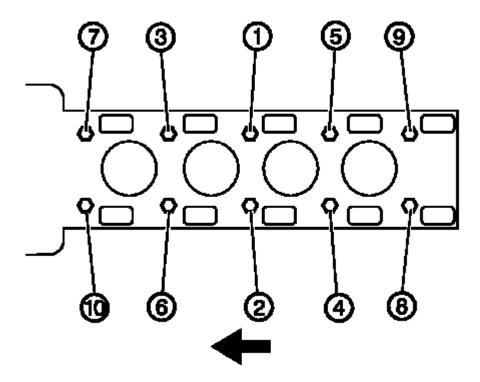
Cylinder Head Bolt Tightening Sequence Courtesy of GENERAL MOTORS COMPANY
